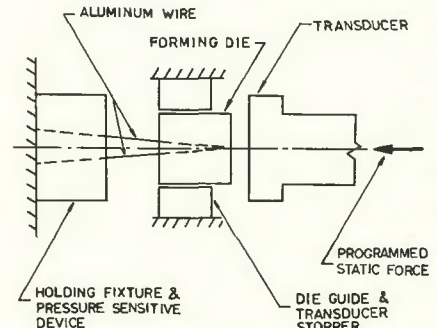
Schematic setup for longitudinal mode (LM) ultrasonic welding
